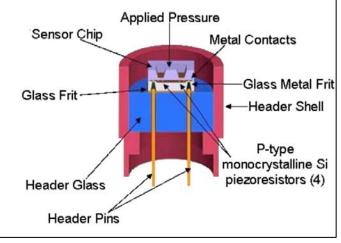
Cross-Sectional view of the leadless sensor mounted in the header.
